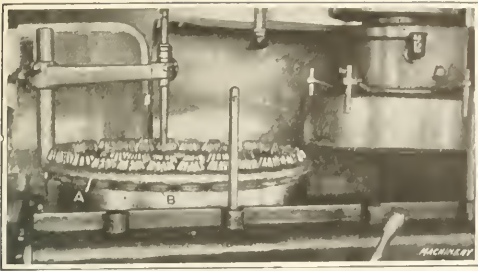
Method of holding and grinding front ends of bevel pinions on a Blanchard vertical surface grinder
